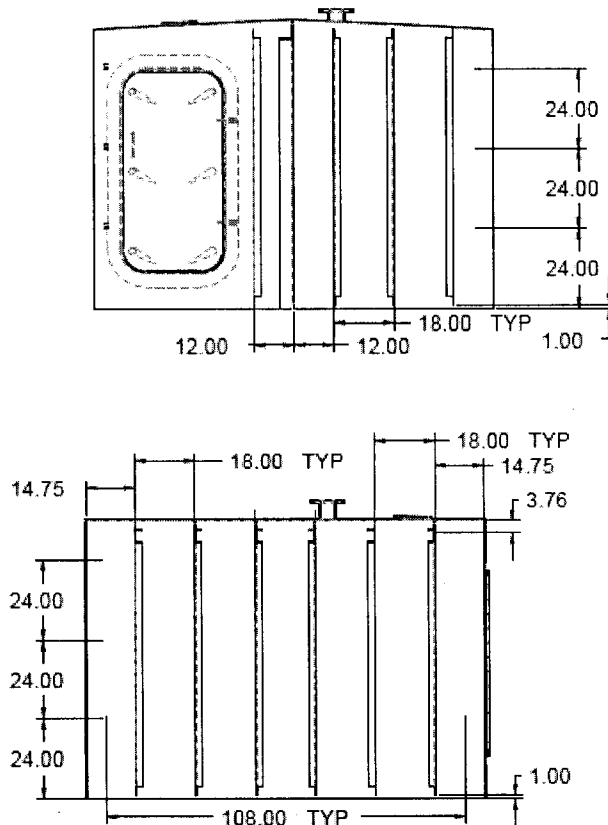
Internal section views of the Machinery House showing scantling spacing (inches) and orientation for two different walls. The walls on opposing sides have the same scantling arrangement.
